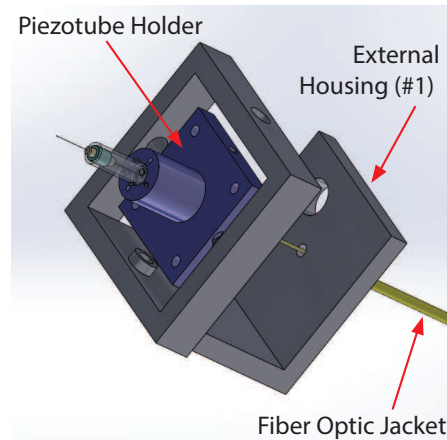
Version 3 housing changes: the piezotube was mounted into a holder with a deeper depression to seat the piezotube. The high voltage wires feed through slots next to the tube. The piezotube holder is mounted inside the first piece of a two-part external housing setup.
